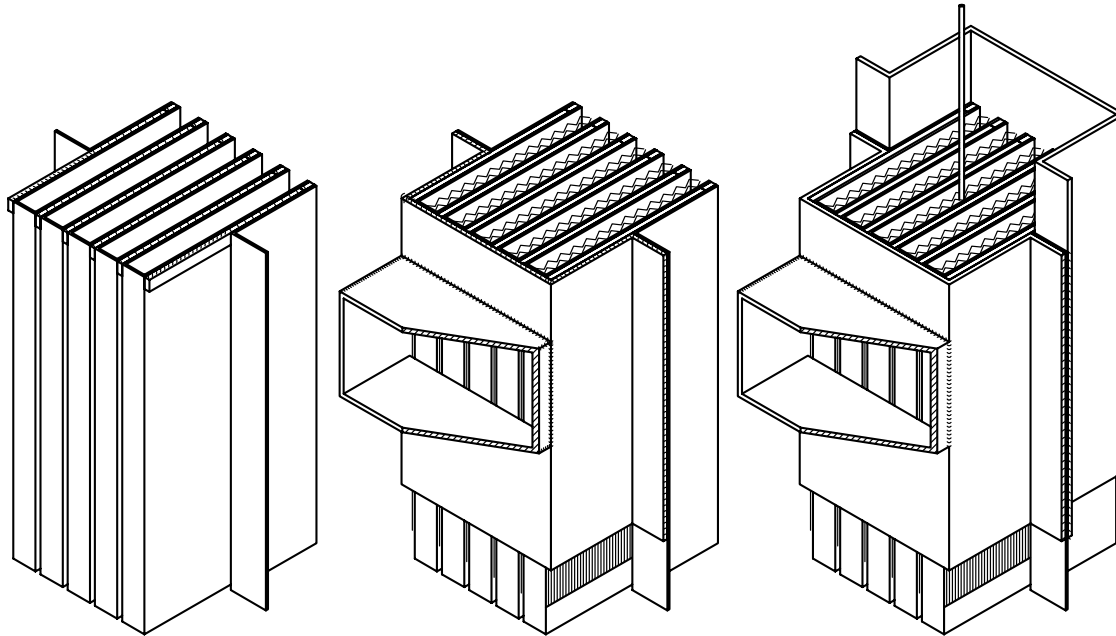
1-kW Counter-current reformer (1st version). Design details of the core folded sheet structure and reactor casing with the drawing concept of the feed/exit port on the combustion side. Notice the sealing of the top openings of all combustion gas channels, which allows feed the reforming side from the top. In the center of the middle reforming channel a thermocouple capillary tube for measuring of the axial temperature in the channel can be recognized.
